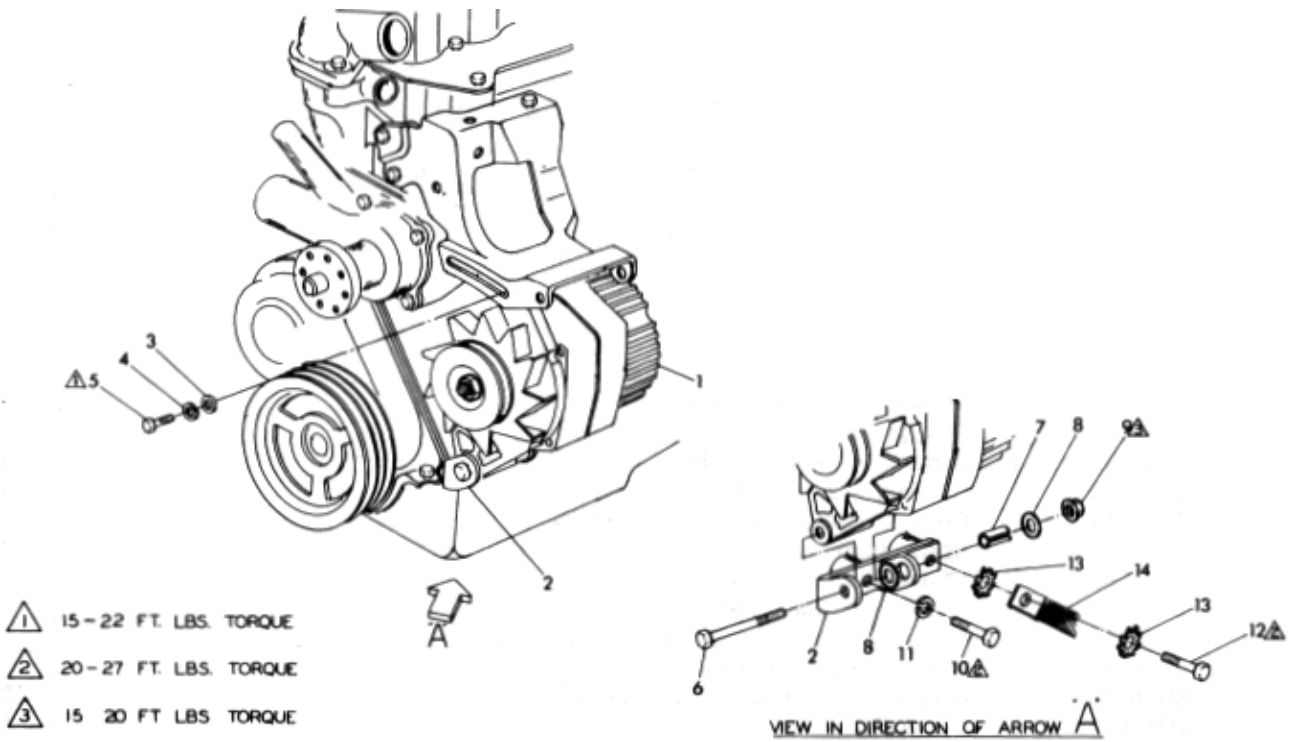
Generator Assembly Mounting, 6 Cylinder
